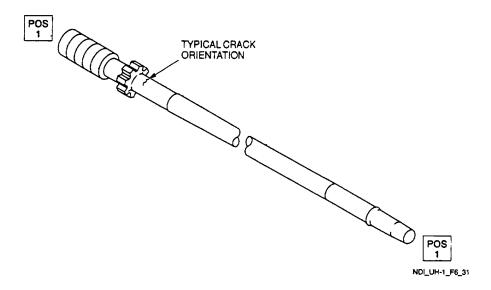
Tail Rotor Control Tube and Quill - Control Tube.
